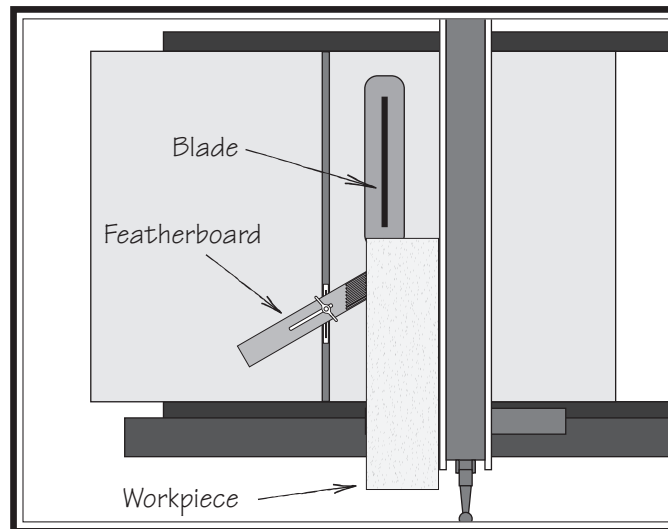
Featherboard installed in miter slot and supporting workpiece for ripping cut.
